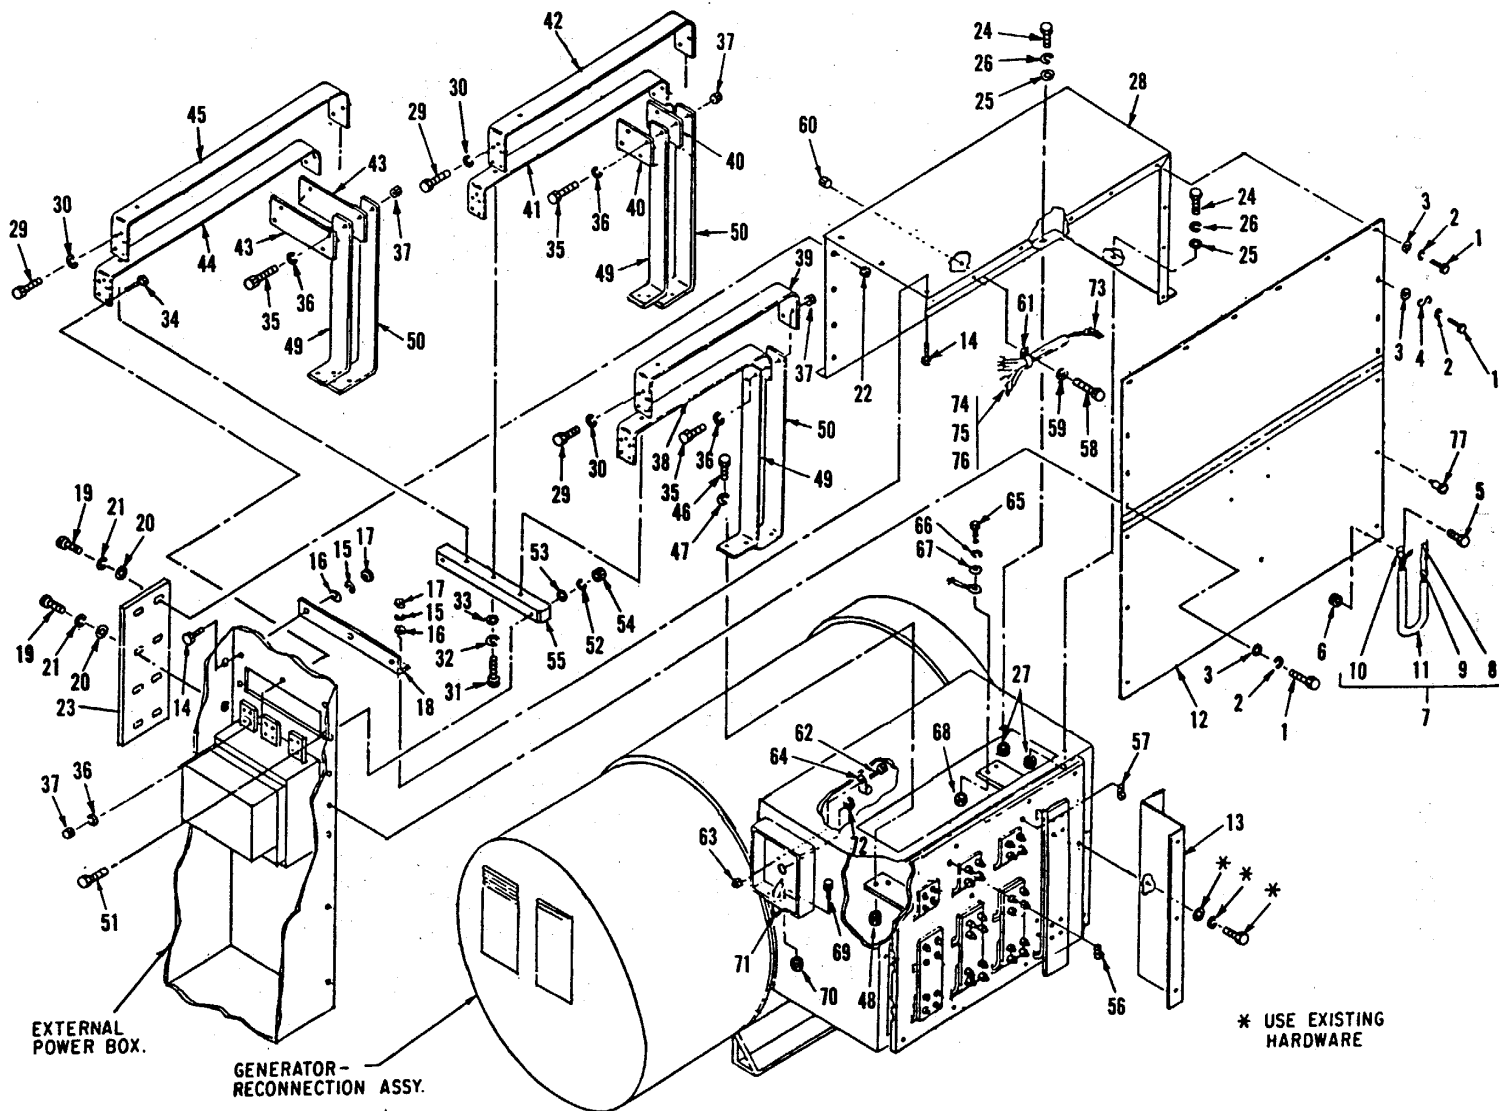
Generator Reconnection and Box Assembly, Exploded View (Sheet 1 of 2)
